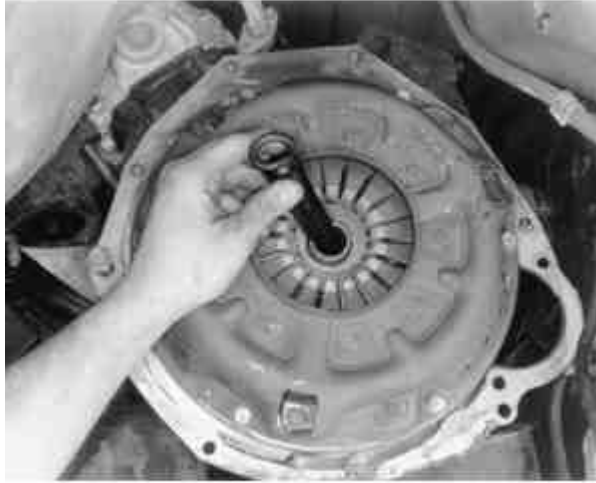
When removing the clutch assembly lock the flywheel from turning
